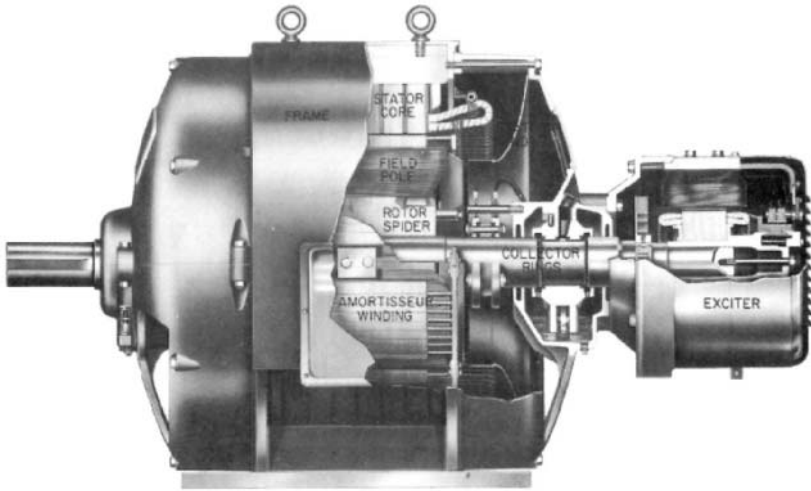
Synchronous motor with direct-connected exciter (Electric Machinery Manufacturing)
